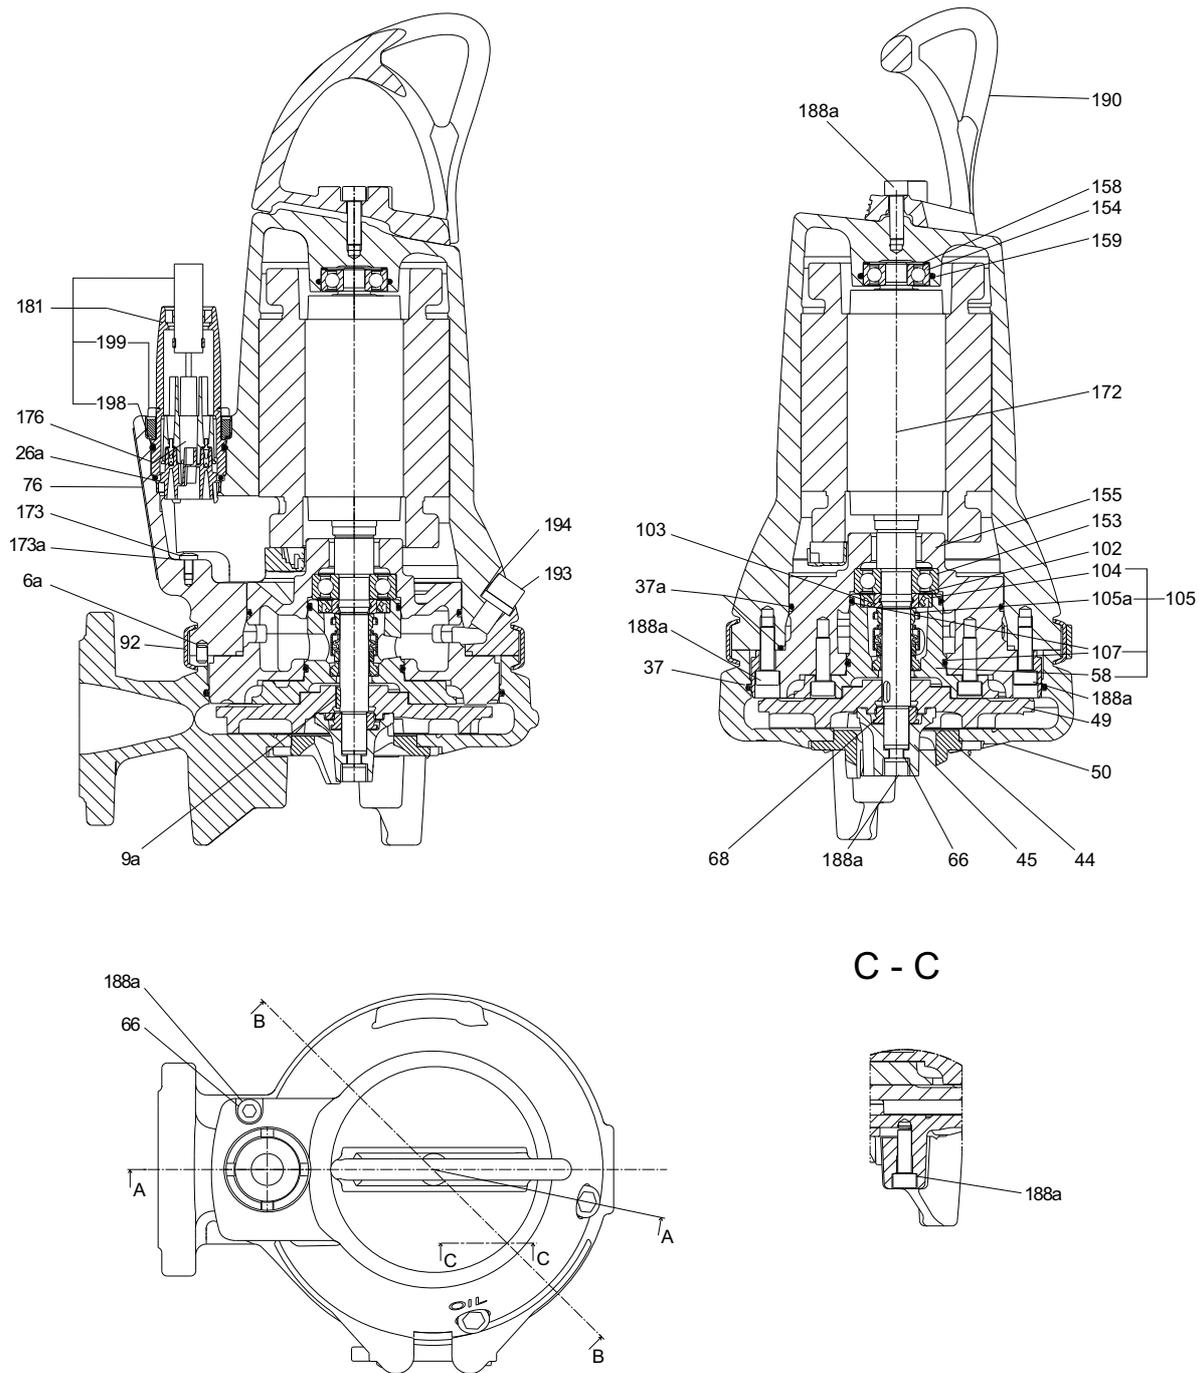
Sectional drawing of SEG pumps, 0.9, 1.2 and 1.5 kW
